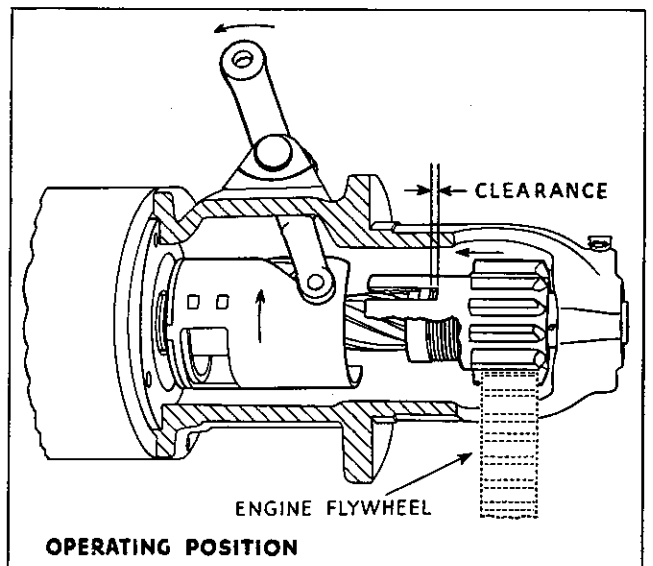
Clearance Between Pinion Guide and Slot for Proper Pinion Engagement.
